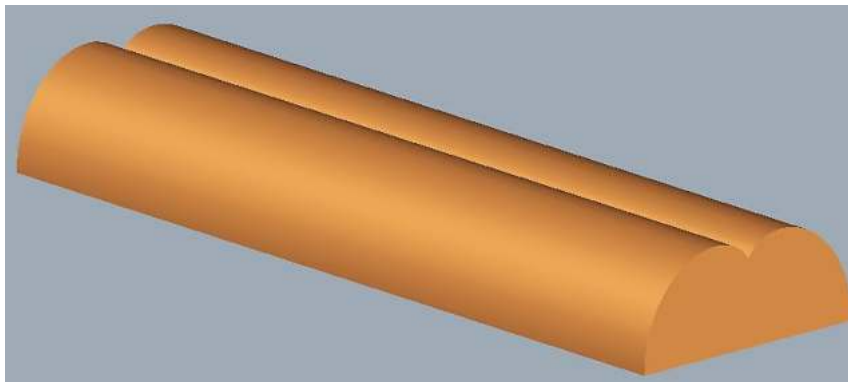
3D Mold AutoCAD design used for the 3D printer
